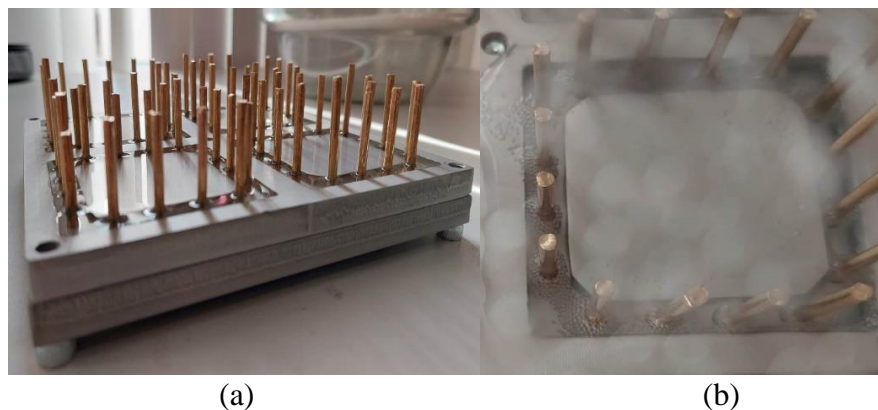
(a) Mold after pouring the mixture (b) Mold in the vacuum while air bubbles are extracted.
